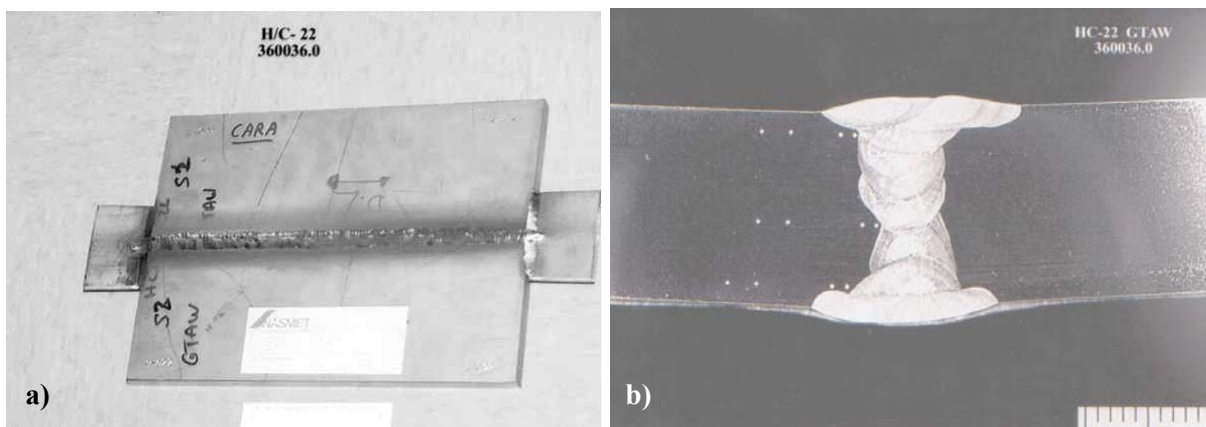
a) GTA welded joint in HC22 plate, b) cross section of the former HC22 GTA welded joint after polishing and metallographic etching. Several Vickers microhardness chains are seen along the welded joint.
